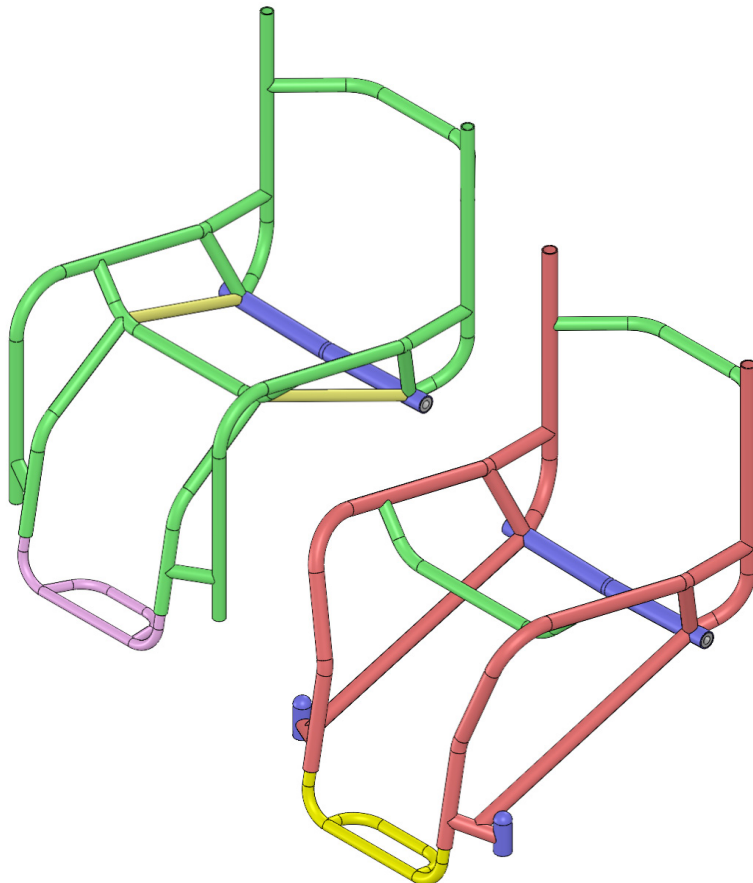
Layout of all components of the Cross-Over frame, sorted by tube diameter
